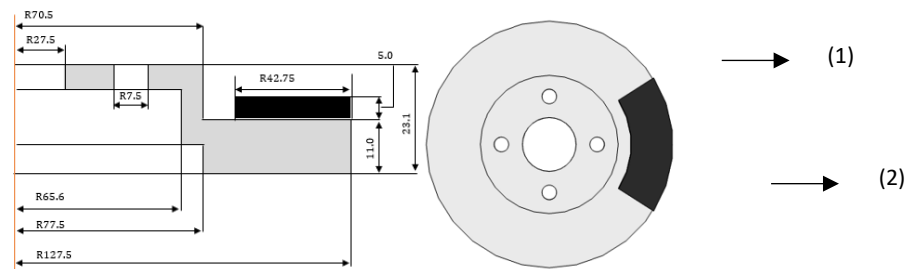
Section of the disc brake model and dimensions. (1) the rotor, (2) the pad
